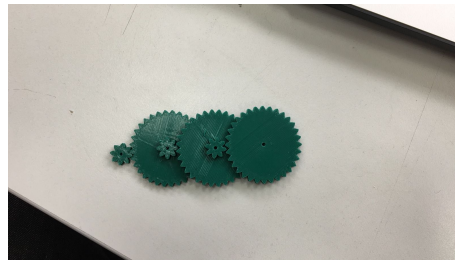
Gears for the above gearbox. Also designed and printed in PLA. Not even in it final model come.
